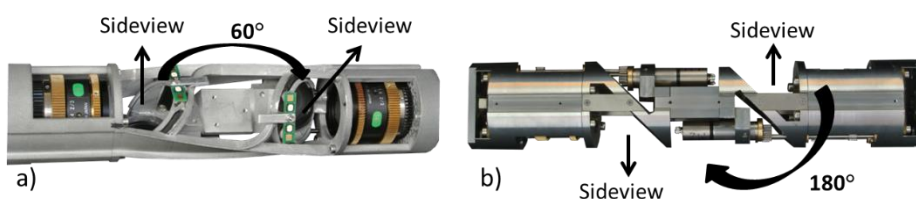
camera unit fabricated using a) SLM and b) cutting.
